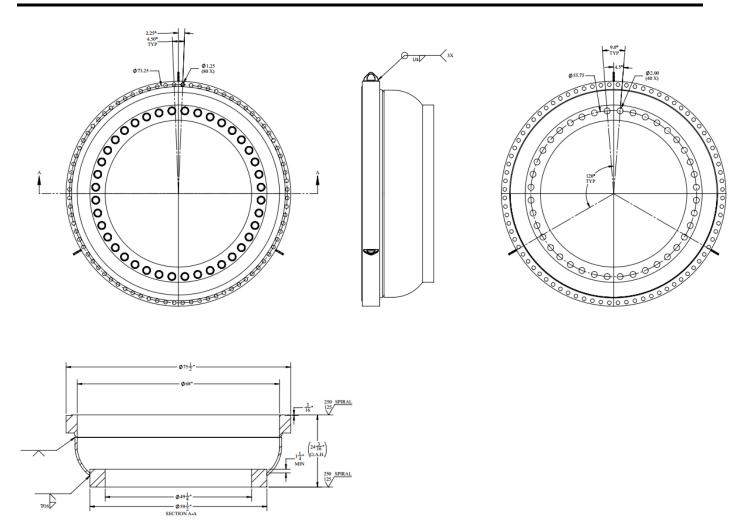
Details of adapter for use on 24.4 m<sup>3</sup> explosion vessel, including top flange dimensions.
